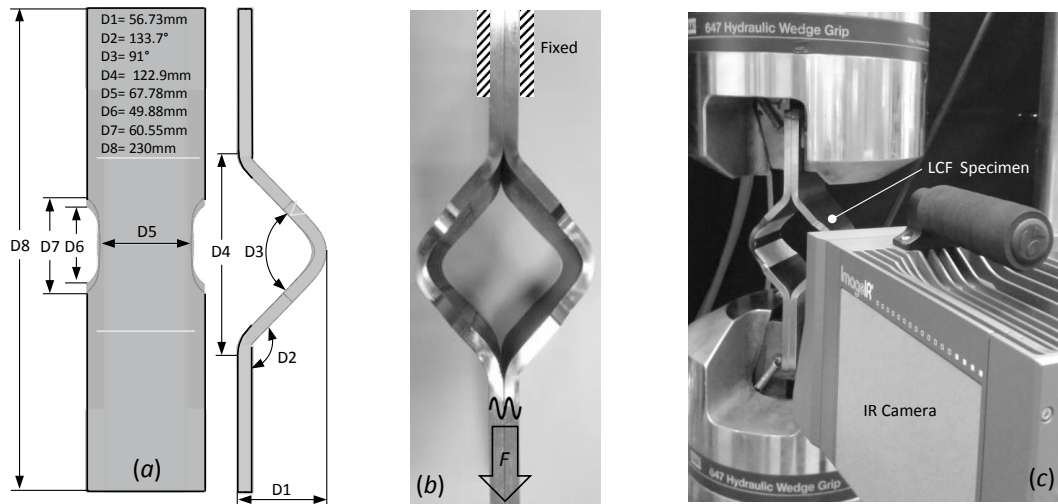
(a) schematic illustration of fatigue specimen after 90° bending with bending ratio i.e.  $r/t=2$ ; (b) the LCF specimen after welding along with the applied fatigue boundary and loading conditions; (c) the LCF fatigue set-up and location of IR camera. The IR camera was focused on area of interest, which is the bending root.
